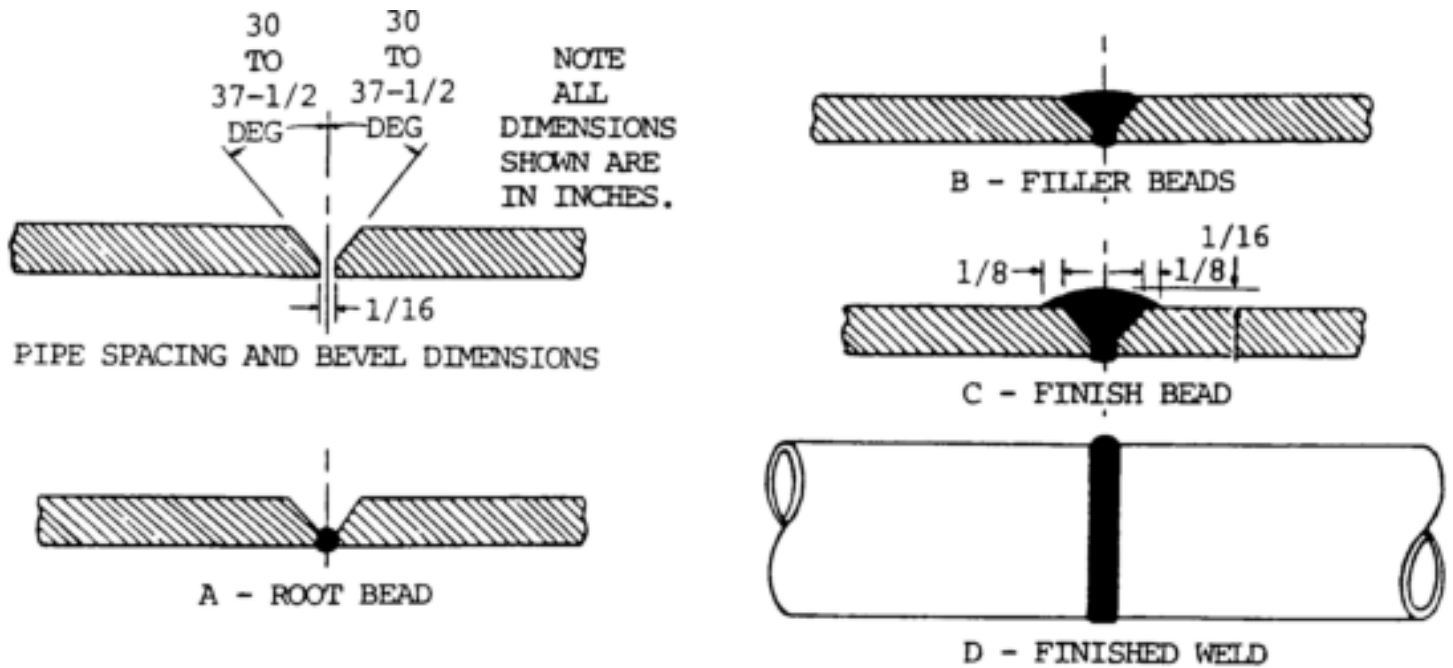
Deposition of root, filler, and finish weld beads.
